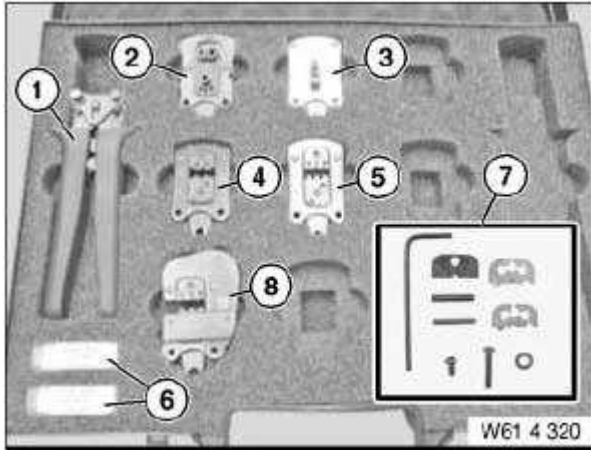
Identifying Crimping Stop Parts (Small Contacts)
